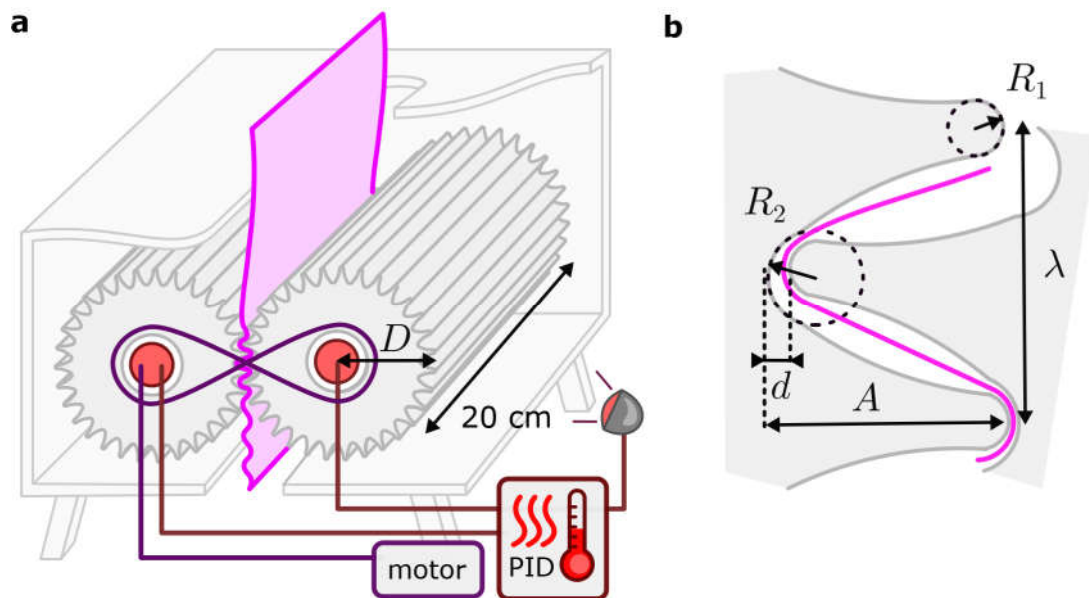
Dynamic thermoforming with heated gears. a, A schematic presentation of the setup. Two aluminium gears (grey), 20 cm long and with diameter D , are mounted on parallel spindles. One spindle is rotated by an external motor; a serpentine belt passively drives the second spindle. A heating rod (red) is inserted into the hollow centre of each gear. The gears are kept at temperature via a heat-sensitive camera connected to a PID controller. The gears are mounted inside a metallic casing. Flat plastic film (pink) is fed into the gears via a slot in the casing, and emerges with plastically deformed grooves. b, Gear geometry. Tooth amplitude A , tooth pitch λ , inner and outer radii R_1 and R_2 , and gear spacing d are shown (values: see main text). The sides of each tooth are concave to ensure smooth rotation. An inserted sheet (pink line) deforms accordingly.
